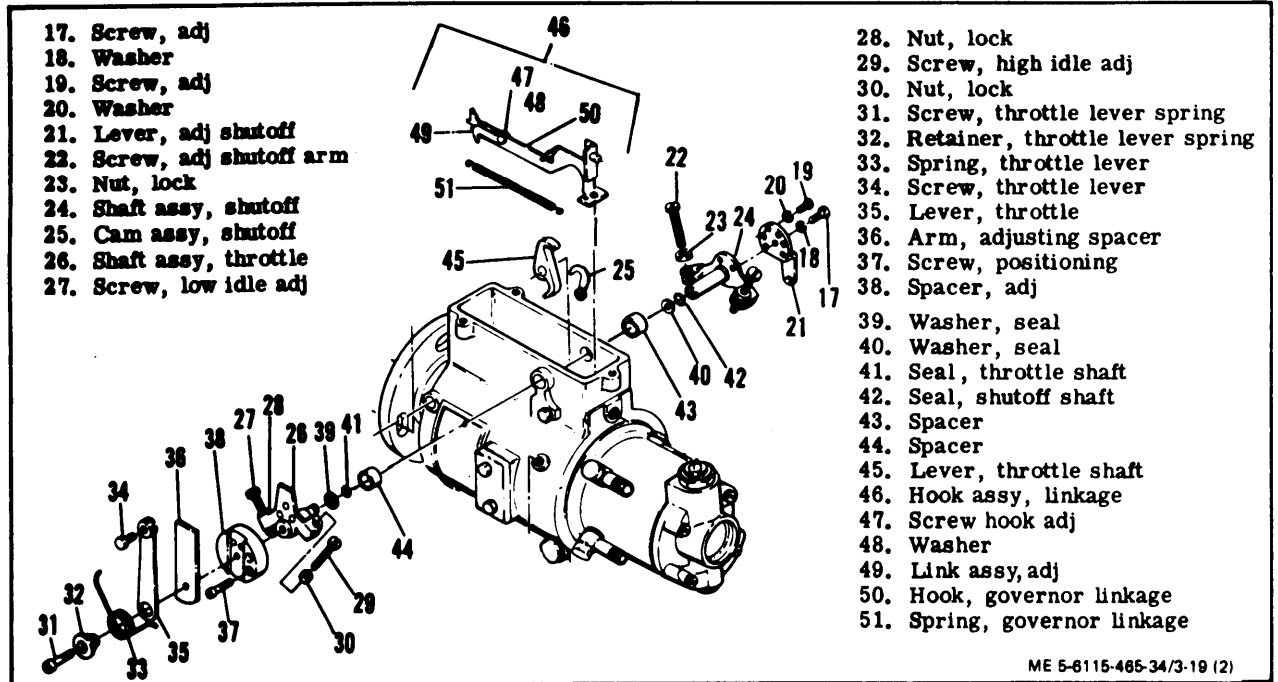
Fuel Injection Pump, Exploded View (Sheet 2 of 7)
